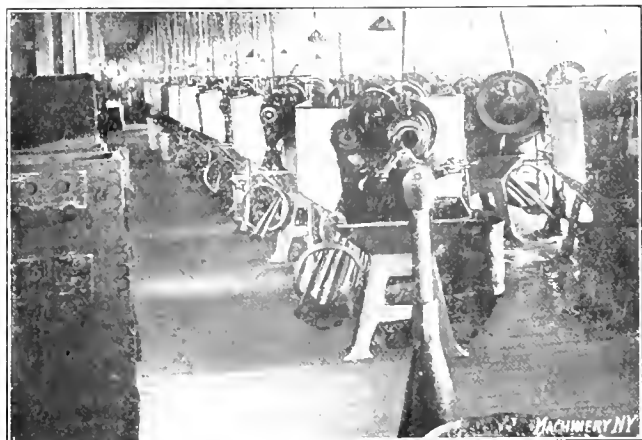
Battery of 340 Automatic Screw Machines, equipped with Splash Guards
